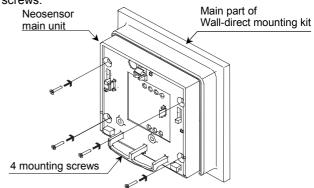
Neosensor mounting on the Wall-direct mounting kit
